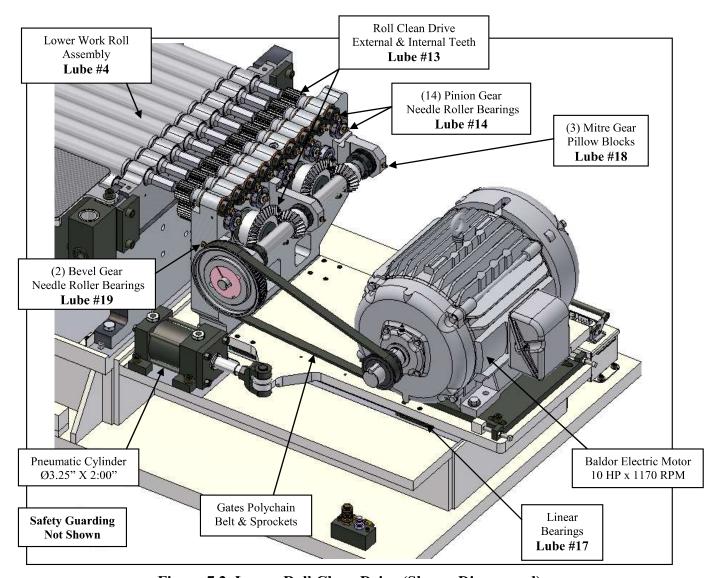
Lower Roll Clean Drive (Shown Disengaged)
